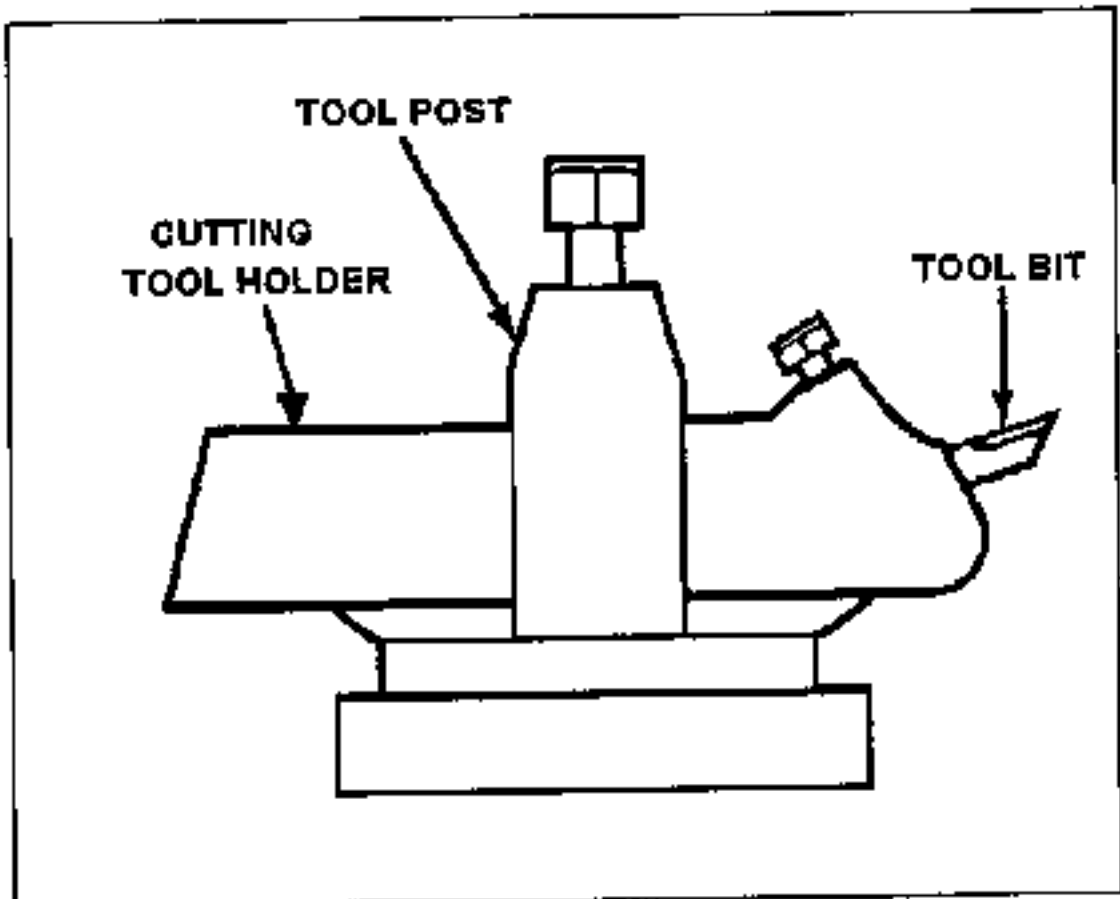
Tool holder with tool bit mounted in a tool post.
